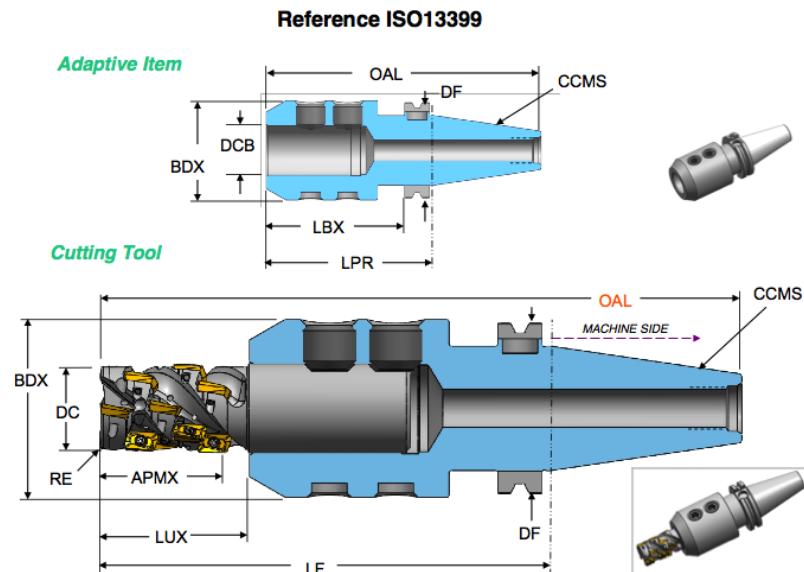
Cutting Tool, Tool Item, and Cutting Item 2
